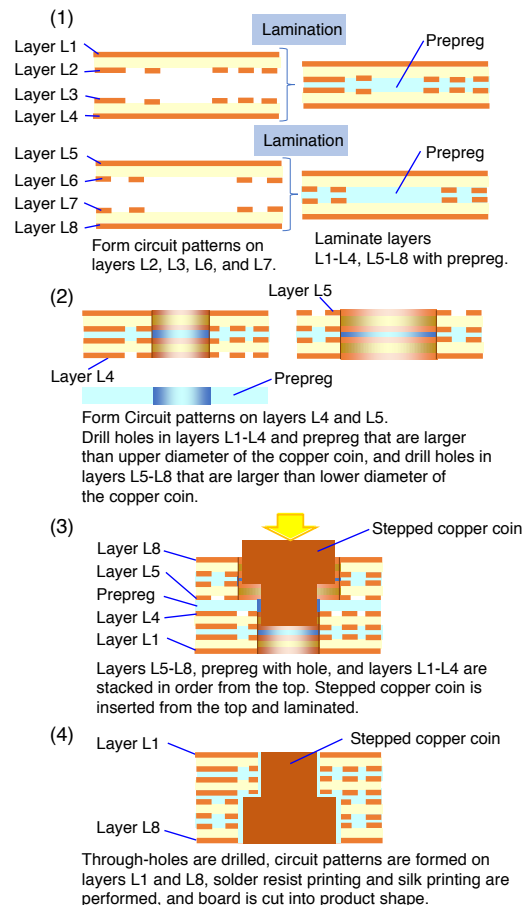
Manufacturing Method of Stepped Copper Coin PWB
